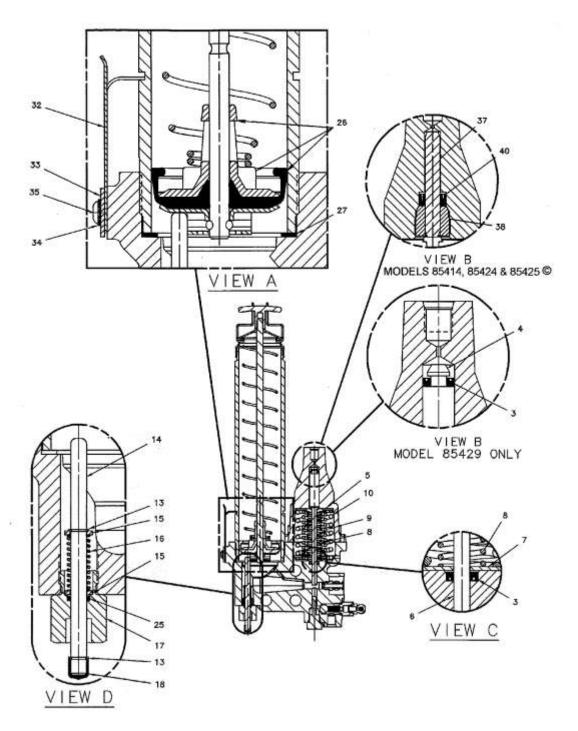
Pump Assembly 570968 [85425] 103270 [85429]
